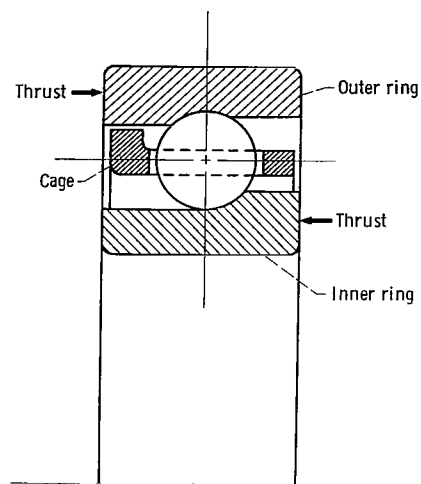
Angular-contact ball bearing with a single-outer-land-guided cage.
